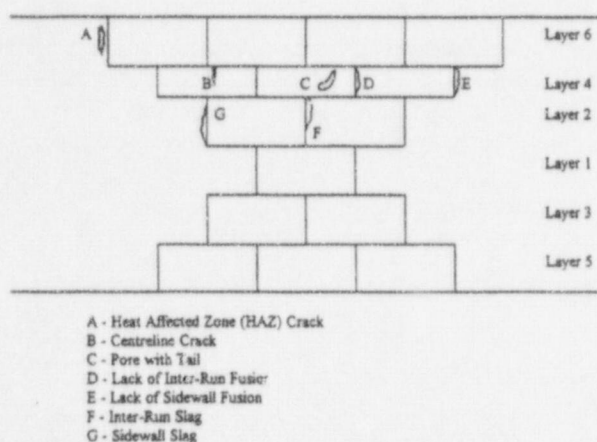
Schematic Representation of Weld Buildup and the Position of Different Types of Crack-Like Defects
